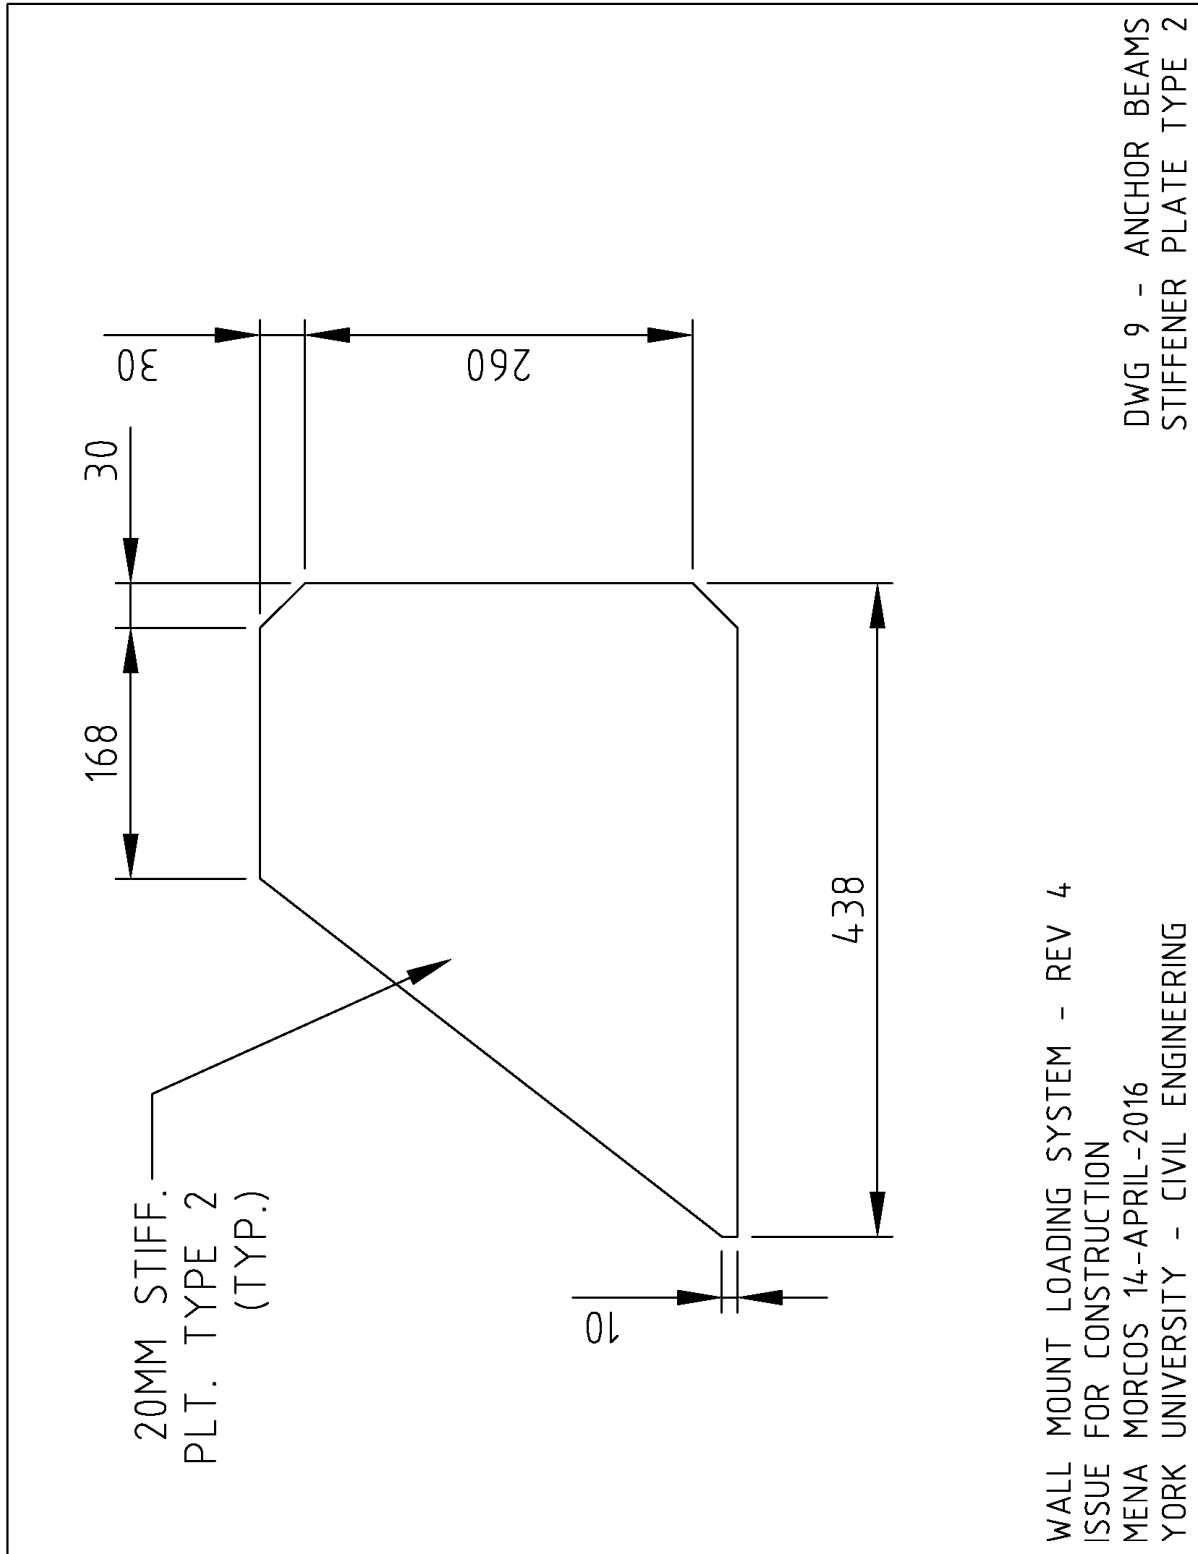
Wall mount loading system design and fabrication drawing – Drawing 9.
